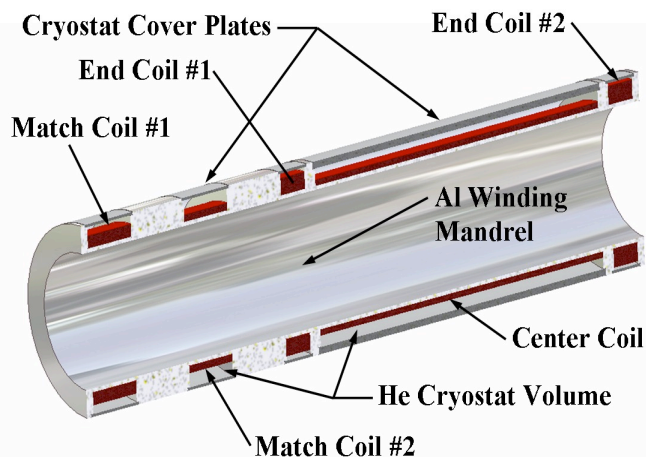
CAD image of the tracker solenoid coils and cold mass assembly.
